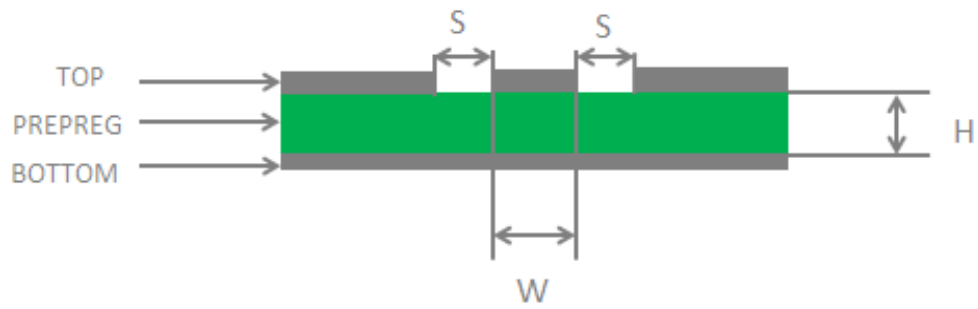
Coplanar Waveguide Design on a 2-layer PCB
